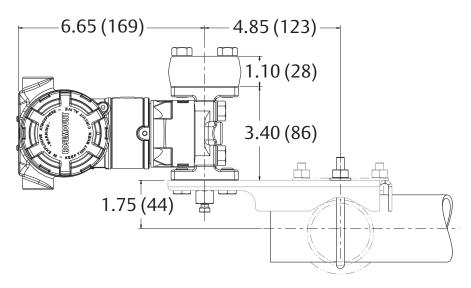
Traditional Flange Mounting Configurations with Optional Brackets for 2-in. Pipe or Panel Mounting
